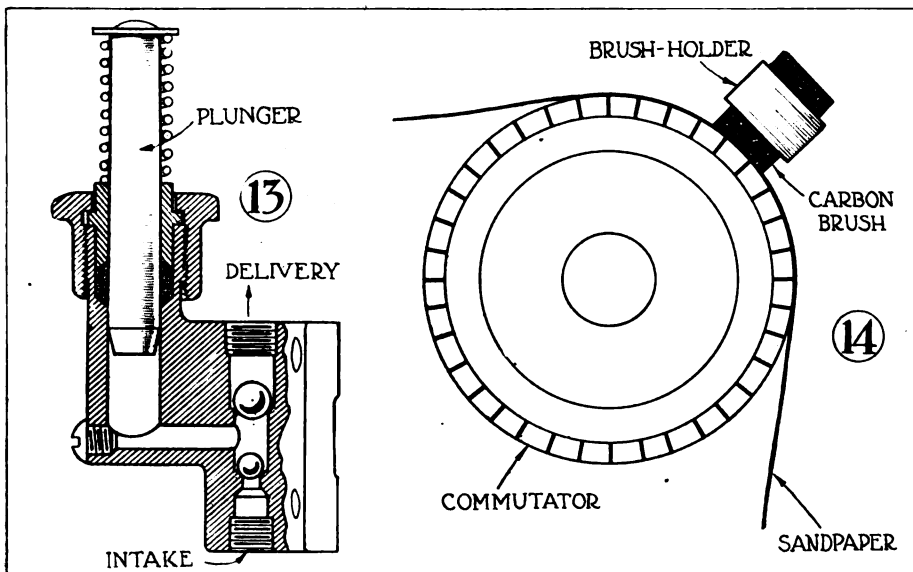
Section showing the sturdy construction of the fuel pump, which is of the plunger type with ball valves. Fig. 14—How a new carbon brush may be made to fit the commutator by inserting a piece of fine sandpaper between the commutator and the brush surface
